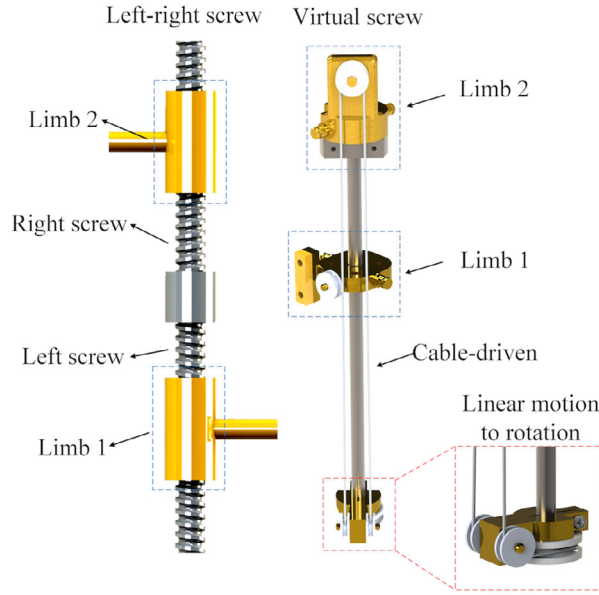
Realization of the virtual screw with a cable-driven mechanism.
